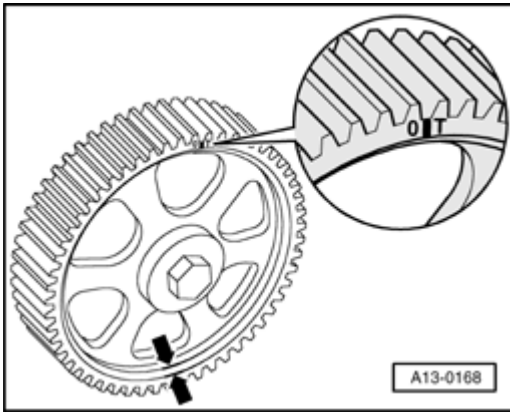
Identifying Camshaft Gear Thin Rib Toward Outside And TDC Marking Visible
